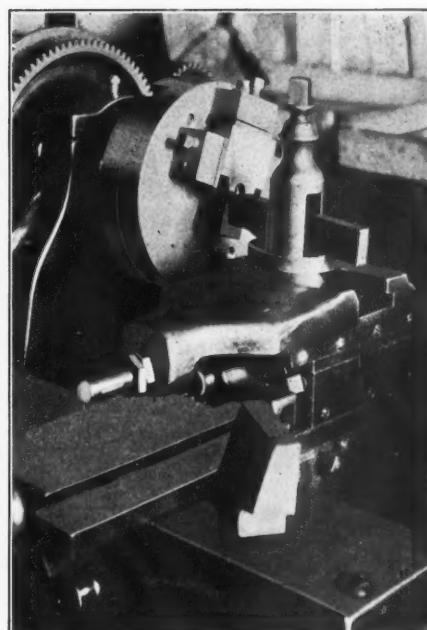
Boring, Threading and Facing Jaws in a Lathe
